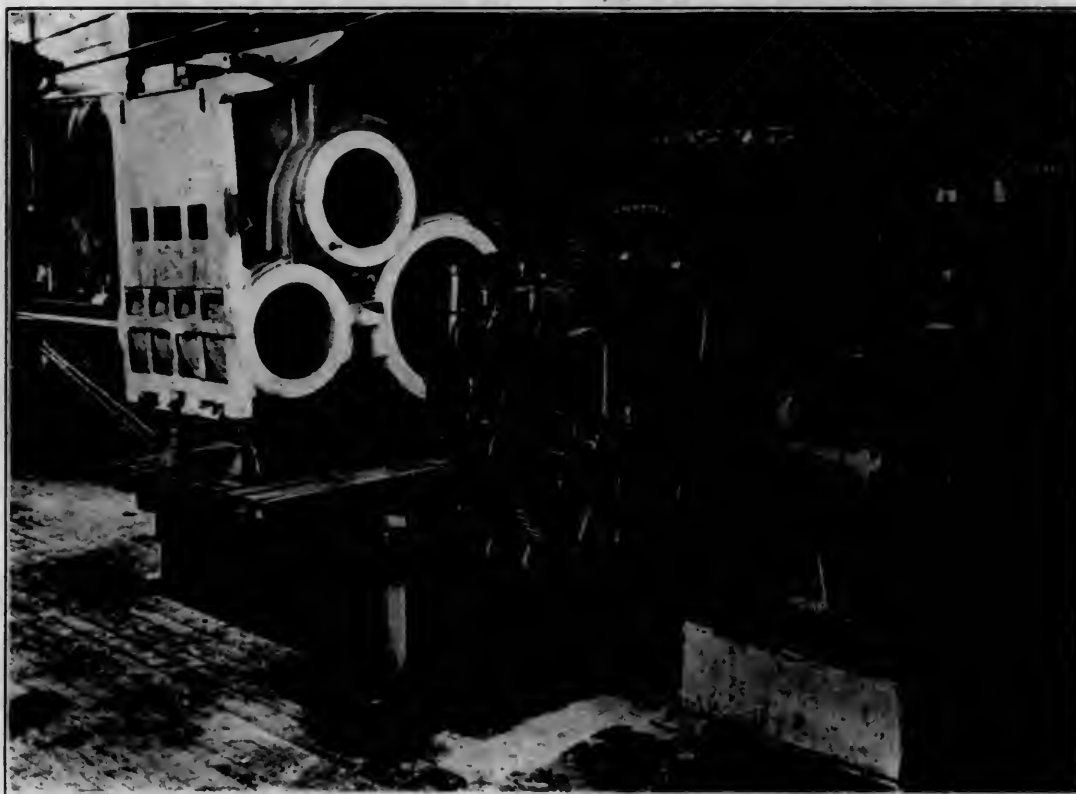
IMPROVED CYLINDER BORING MACHINE ENTIRELY RECONSTRUCTED IN RAILROAD SHOP AND TOOL ROOM. THIS IS AN EXAMPLE OF THE FACILITY WITH WHICH EVEN LARGE SPECIAL MACHINES MAY BE PRODUCED BY A THOROUGHLY ARRANGED AND EQUIPPED TOOL ROOM AND FORCE. THIS MACHINE WILL BORE, FACE AND FINISH COMPLETE AN 18-INCH SINGLE CYLINDER IN FROM TWO TO THREE HOURS, WHICH IS EQUAL TO THE PERFORMANCE OF ANY COMMERCIAL TOOL.
